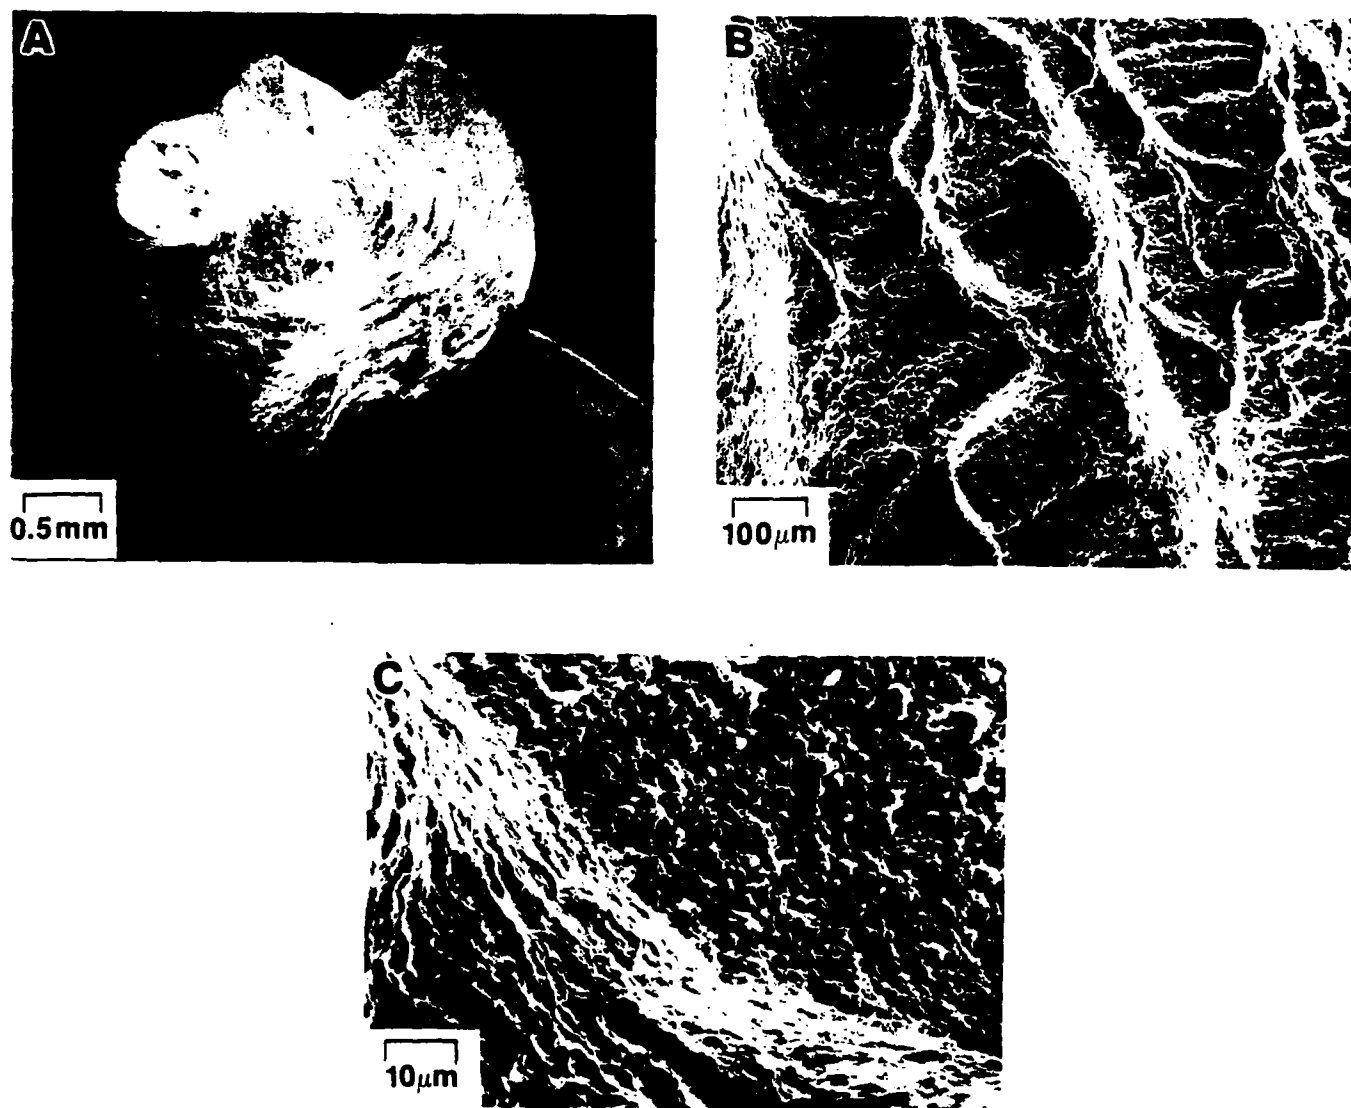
SEM fractographs of tensile tested Al-9Fe-4Ce inertia-friction weld produced at high axial force: (A) macroscopic fracture surface, (B, C) interface fracture surface at increased magnification.
